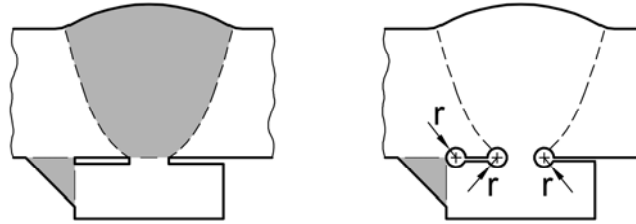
Rounding of the weld root of a non-penetrating fillet weld by a keyhole and an U-shaped notch
